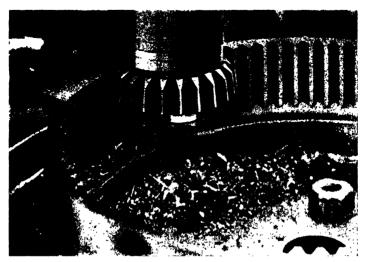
CUTTING AN INTERNAL GEAR IN THE D.B.S. WORKS
